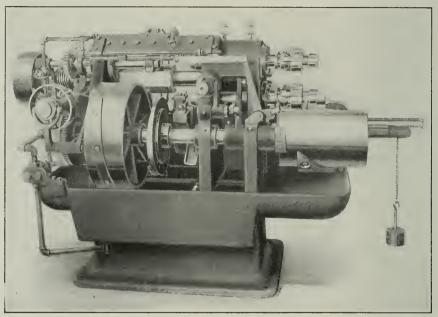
Gridley Multiple-Spindle Automatic Turret Lathe (Rear View)
